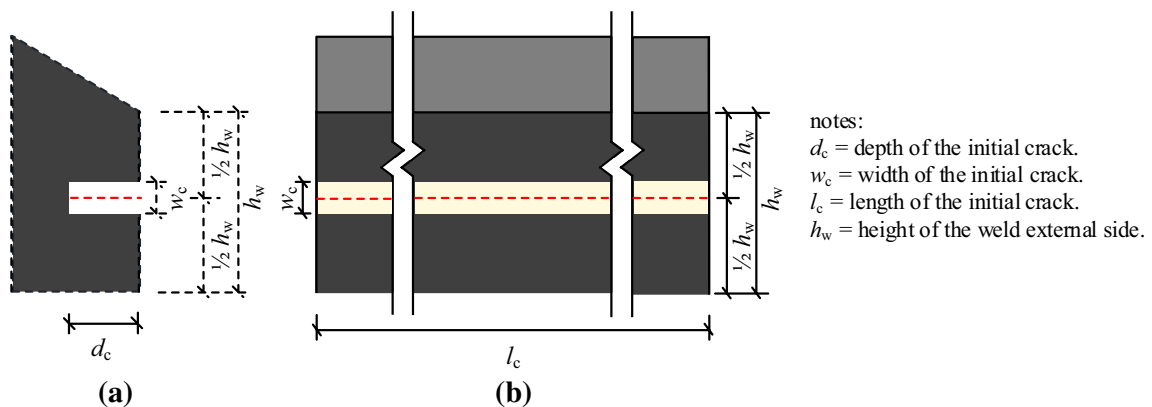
Geometrical dimensions of the initial crack: a side view and b elevation view
